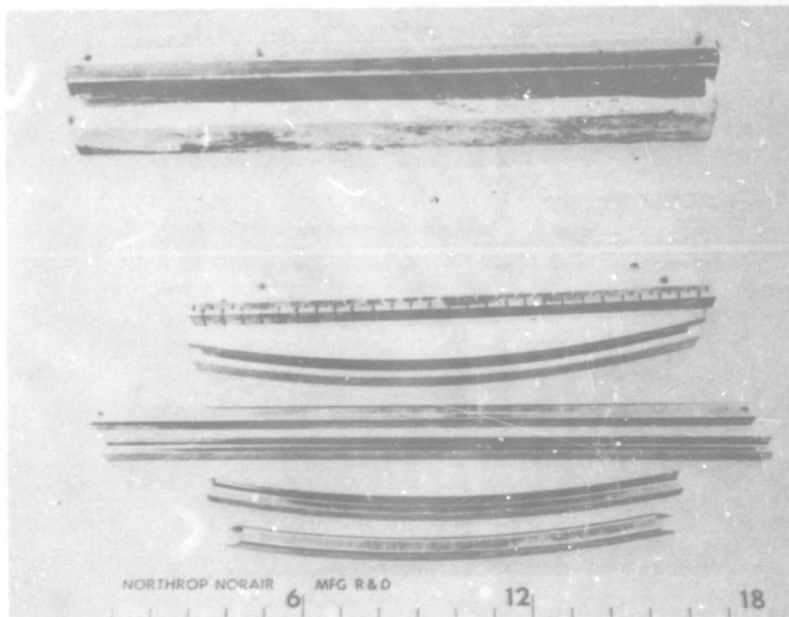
FLAT AND CURVED STRUCTURAL EDGEMEMBER TOOLING AND PARTS FORMED FROM .025" T111 SHEET ON A VERSION WHEELON HYDROPRESS AND HUFFORD STRETCH PRESS
